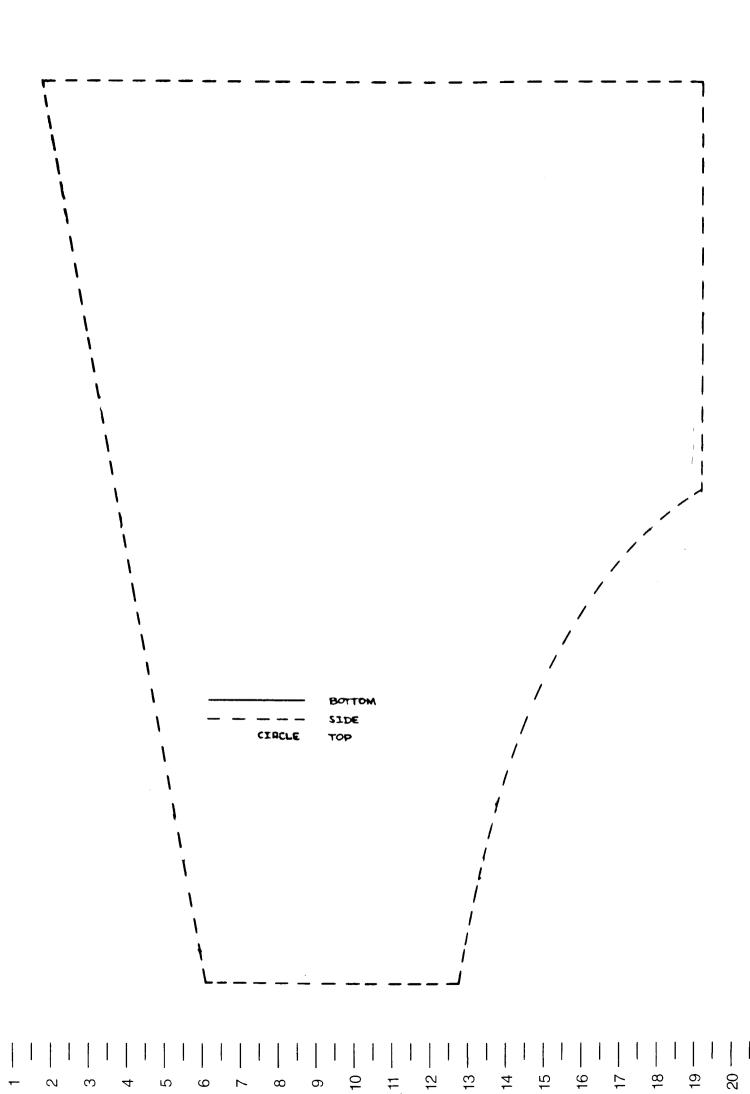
PROFILES FOR MAKING MASTER MOLD FOR BOWL (FULL SIZE)
